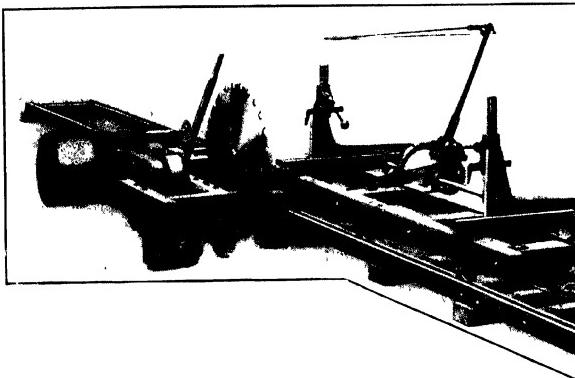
A right-hand saw mill. Saw has inserted teeth.
